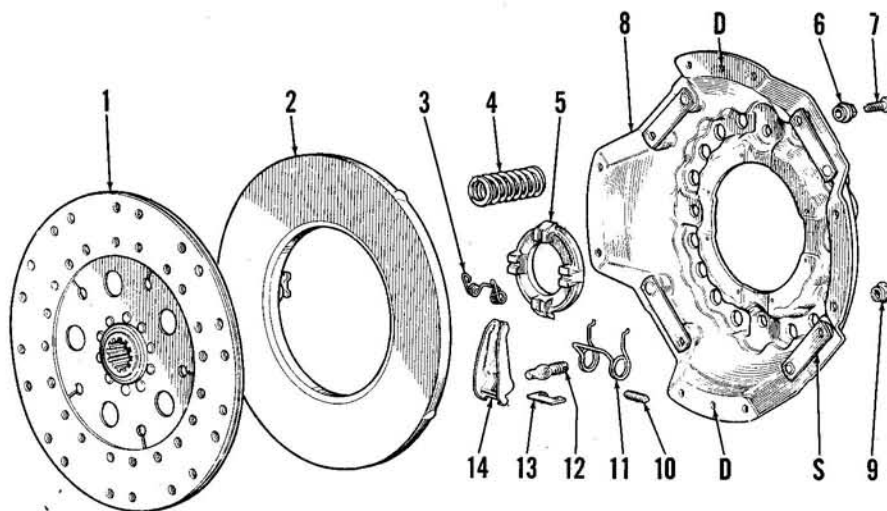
Exploded view of 13-inch single clutch assembly. Refer also to Figs. 109 and 110.
